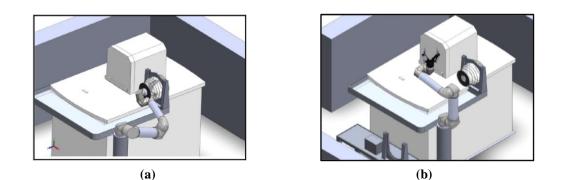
Enclosure Concept 1 – Loading Gripper & Transfer (a) Second Docking Station (b) Removal of Gripper
